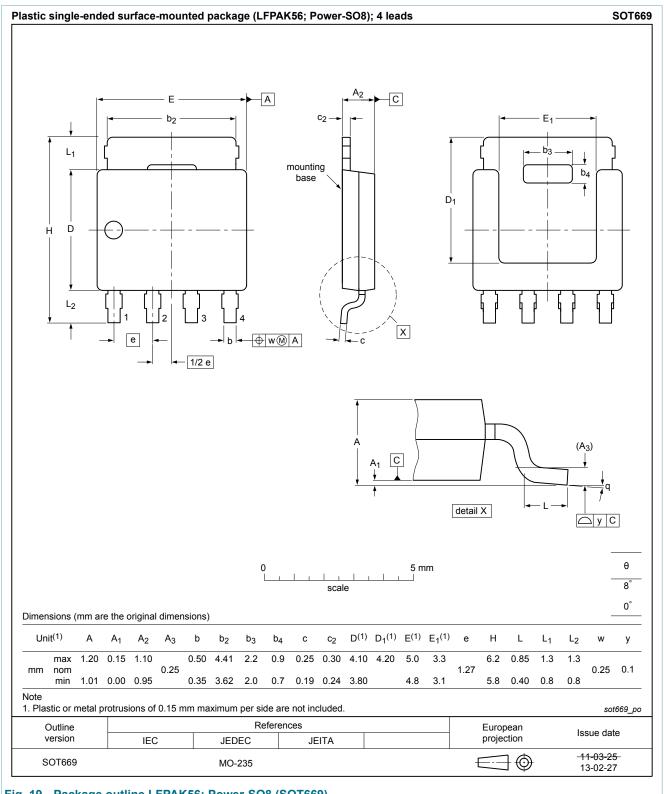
Package outline LFPAK56; Power-SO8 (SOT669)
